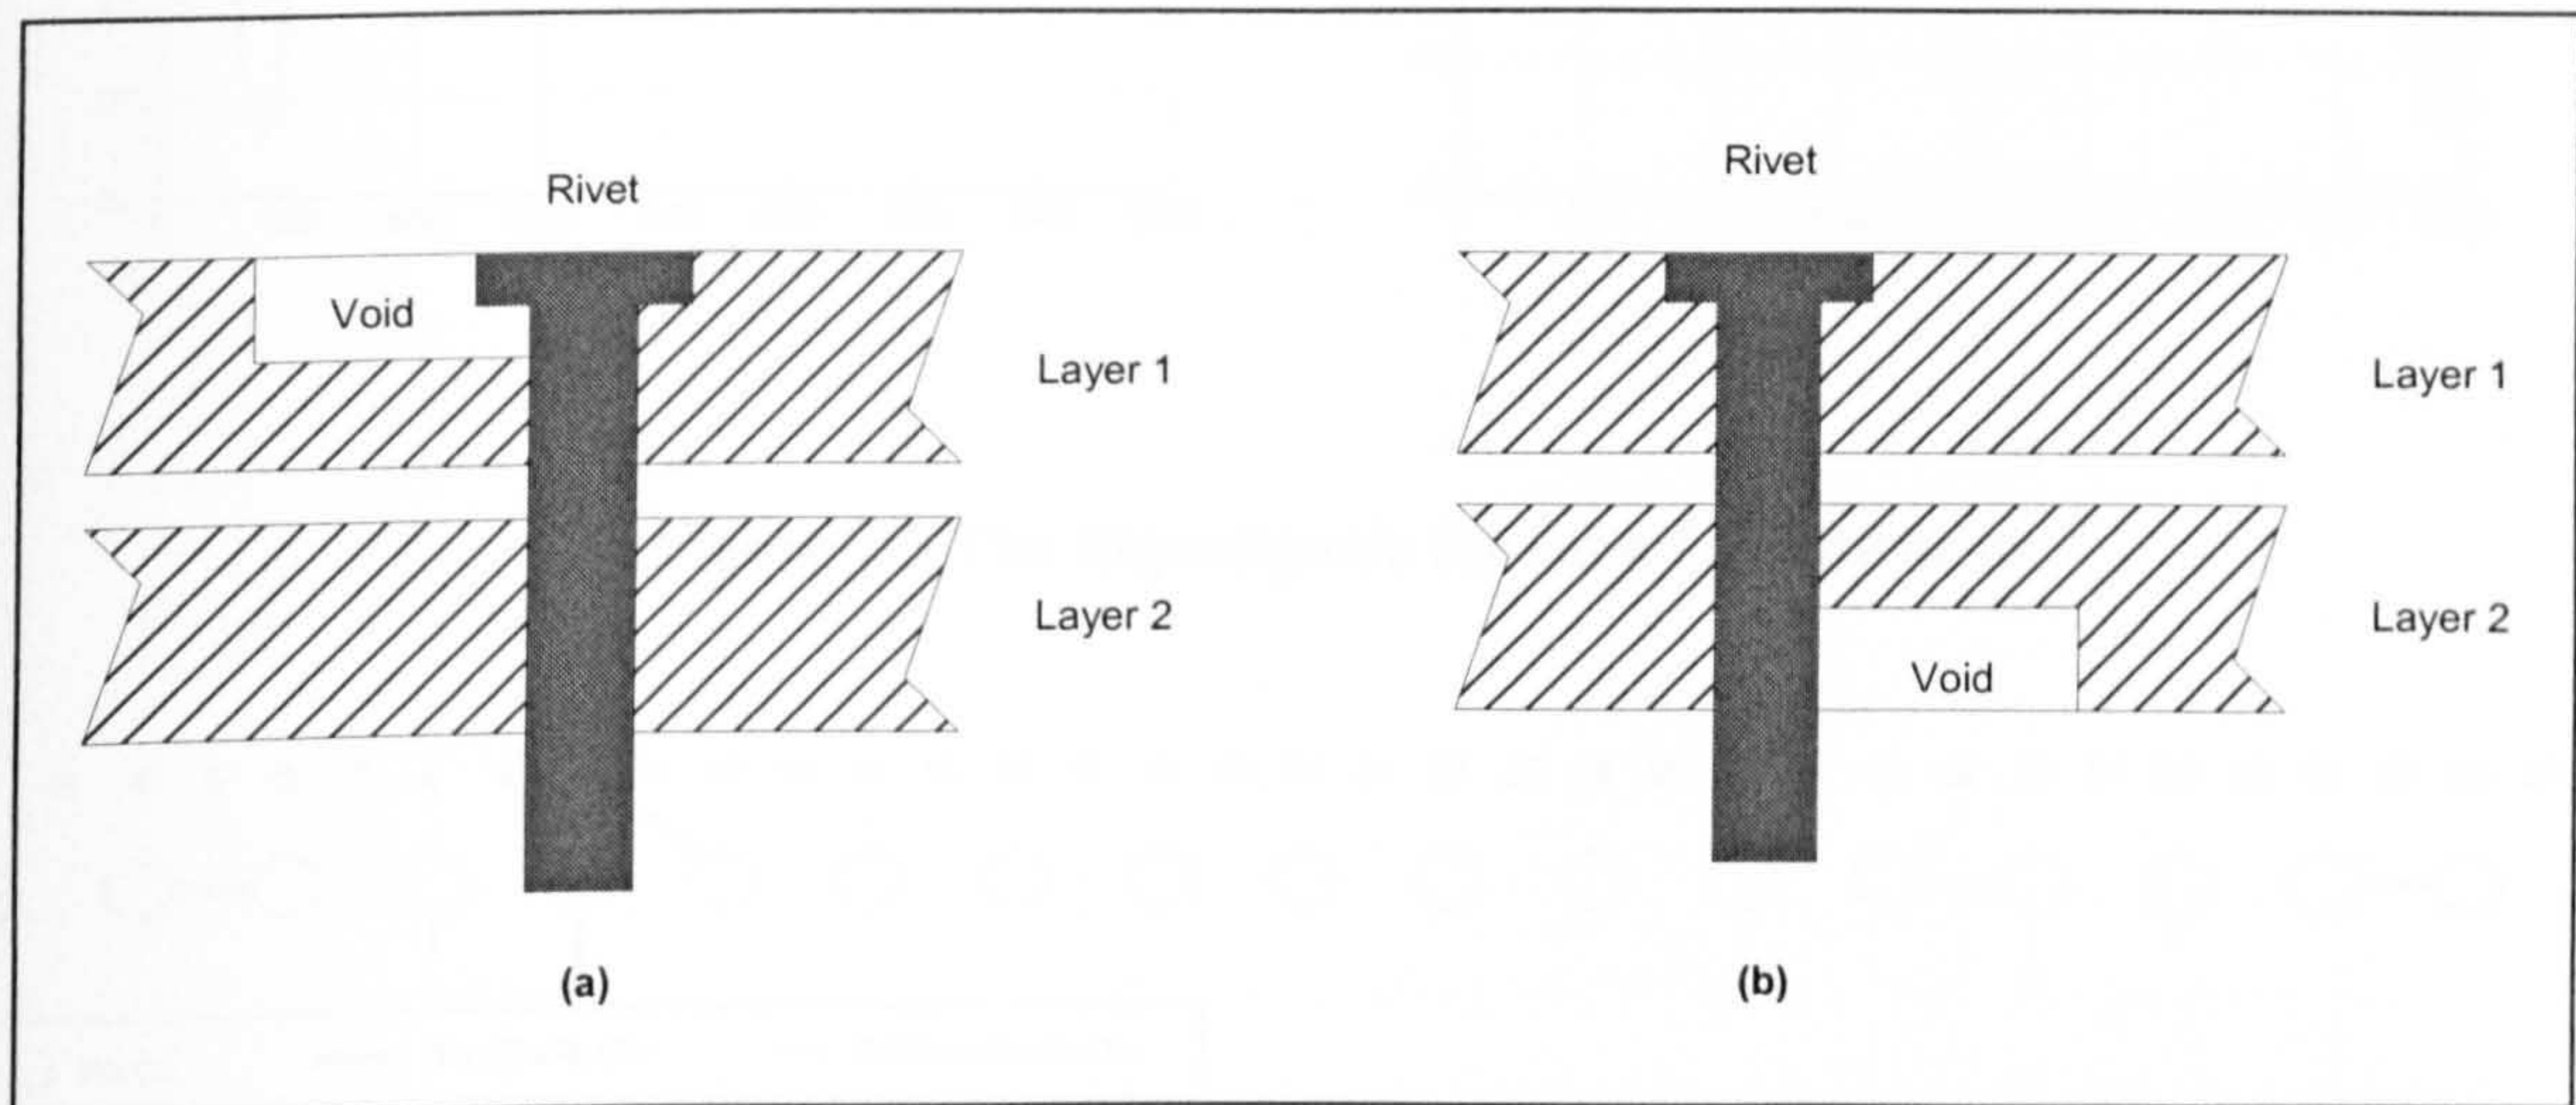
Rivet and Flaw Structures: (a) Top defect; (b) Bottom defect
